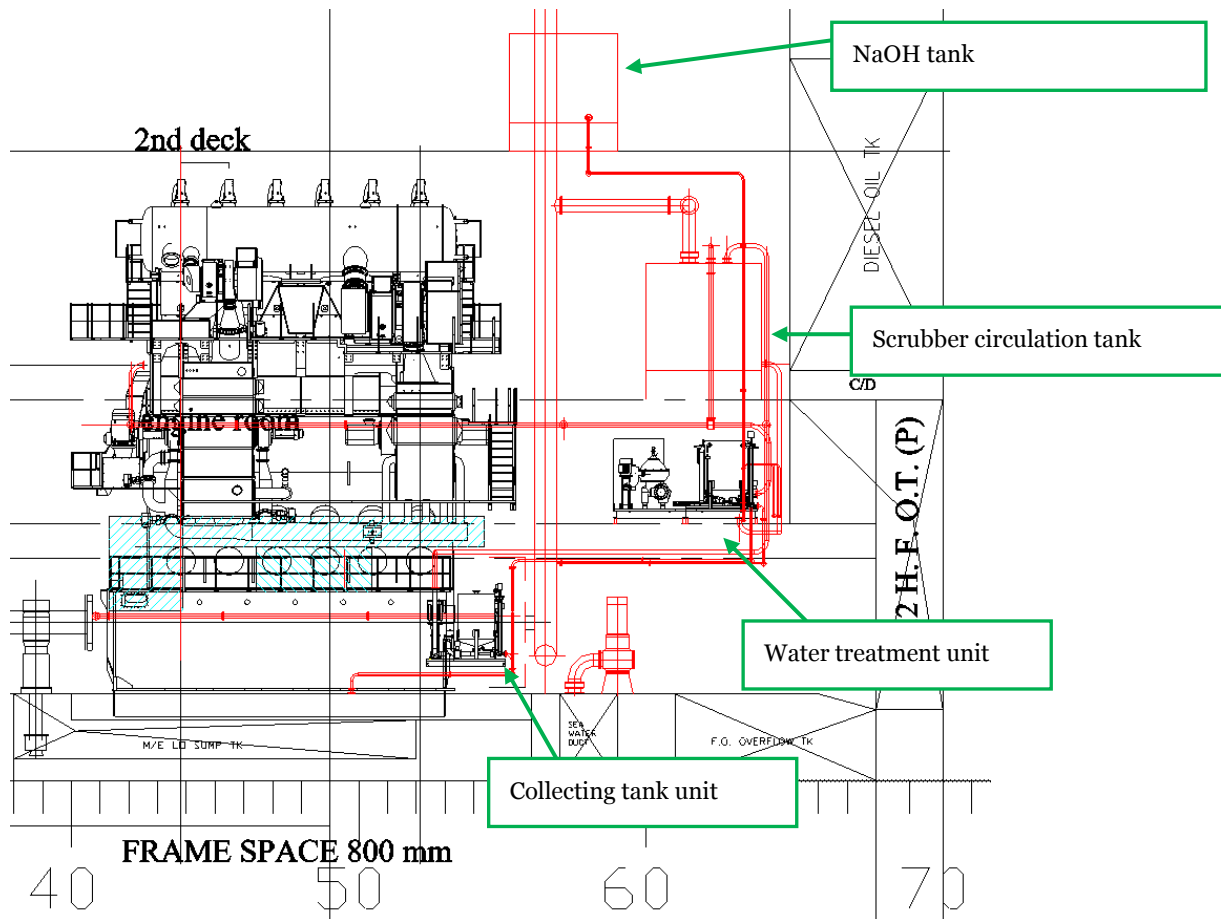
Arrangement of auxiliary equipment seen from star board side.
